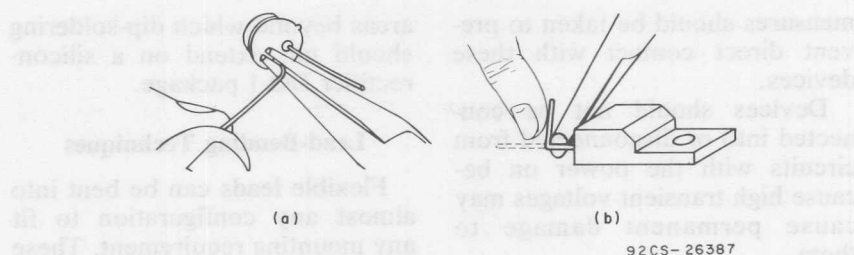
Method of bending leads on thyristor packages: (a) JEDEC TO-5 hermetic package; (b) JEDEC TO-220AB (Versawatt) molded-plastic package.
